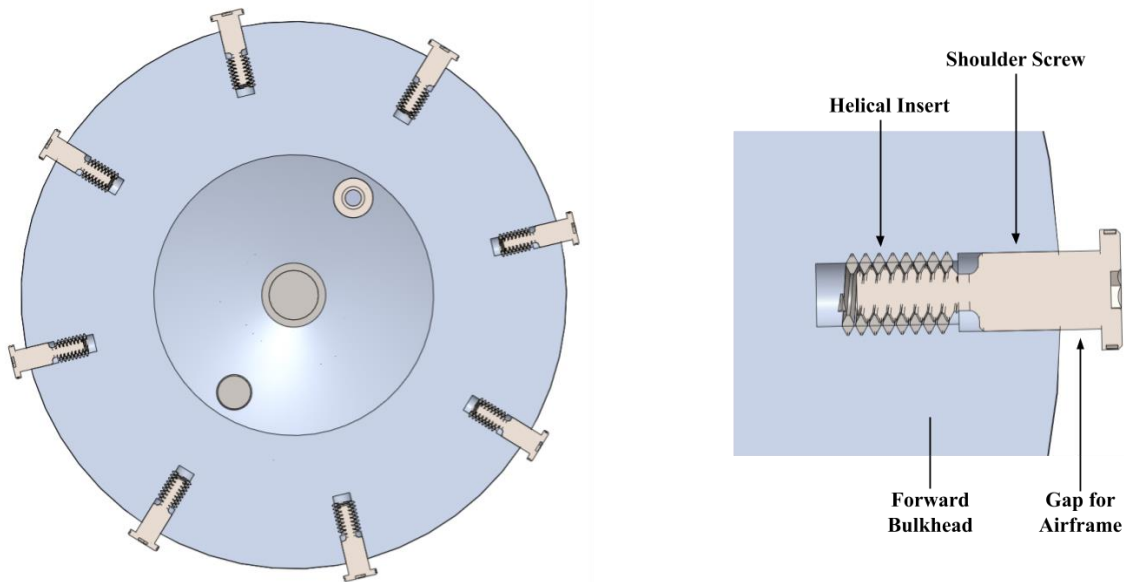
Forward Bulkhead Fasteners with Cross Section View
